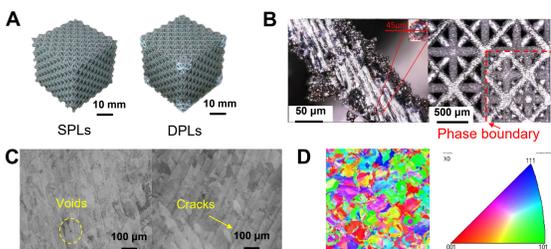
(A) DPL samples fabricated by selected laser melting based additive manufacturing together with the single-phase counterparts. (B) Mesoscopic printing details. (C) Manufacturing defects observed. (D) EBSD characterization
